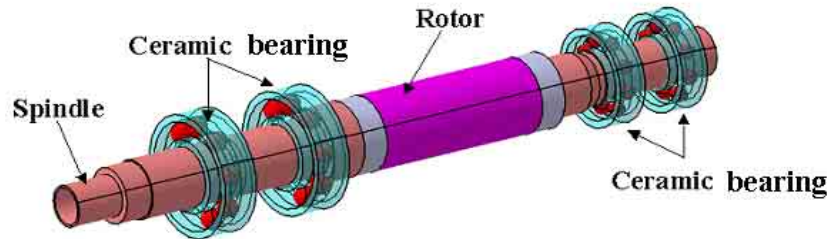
Typical components and configuration of a built-in motor spindle system
